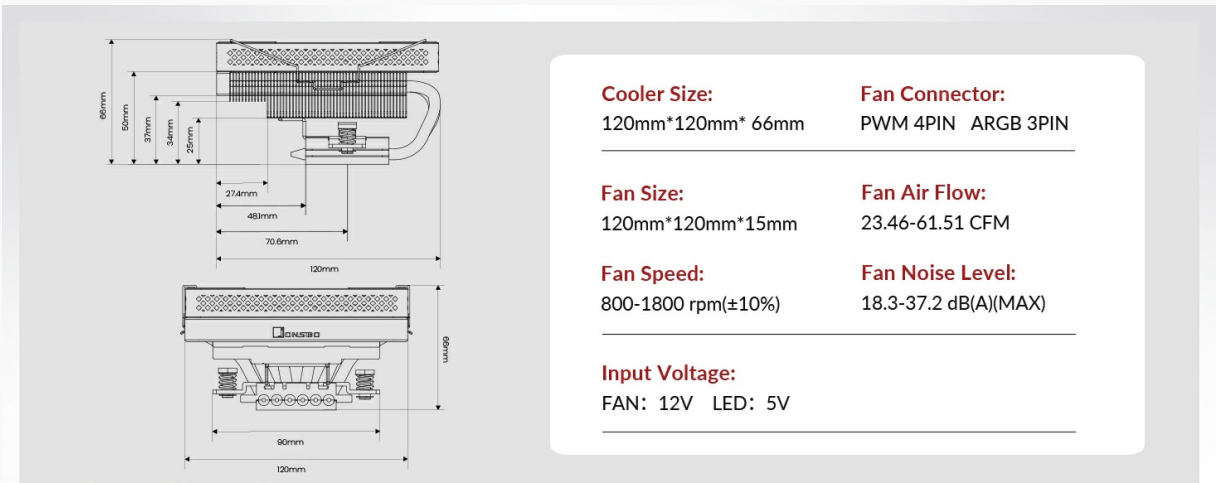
Detailed dimensions and fan specifications of the HP600 cooler.
